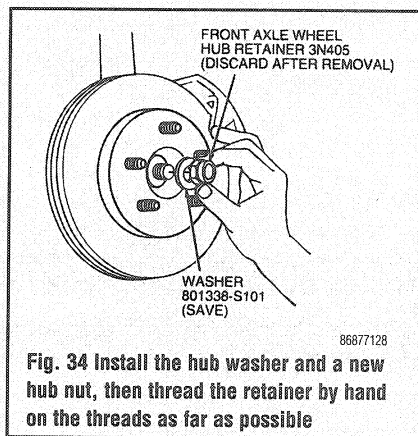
Install the hub washer and a new hub nut, then thread the retainer by hand on the threads as far as possible
